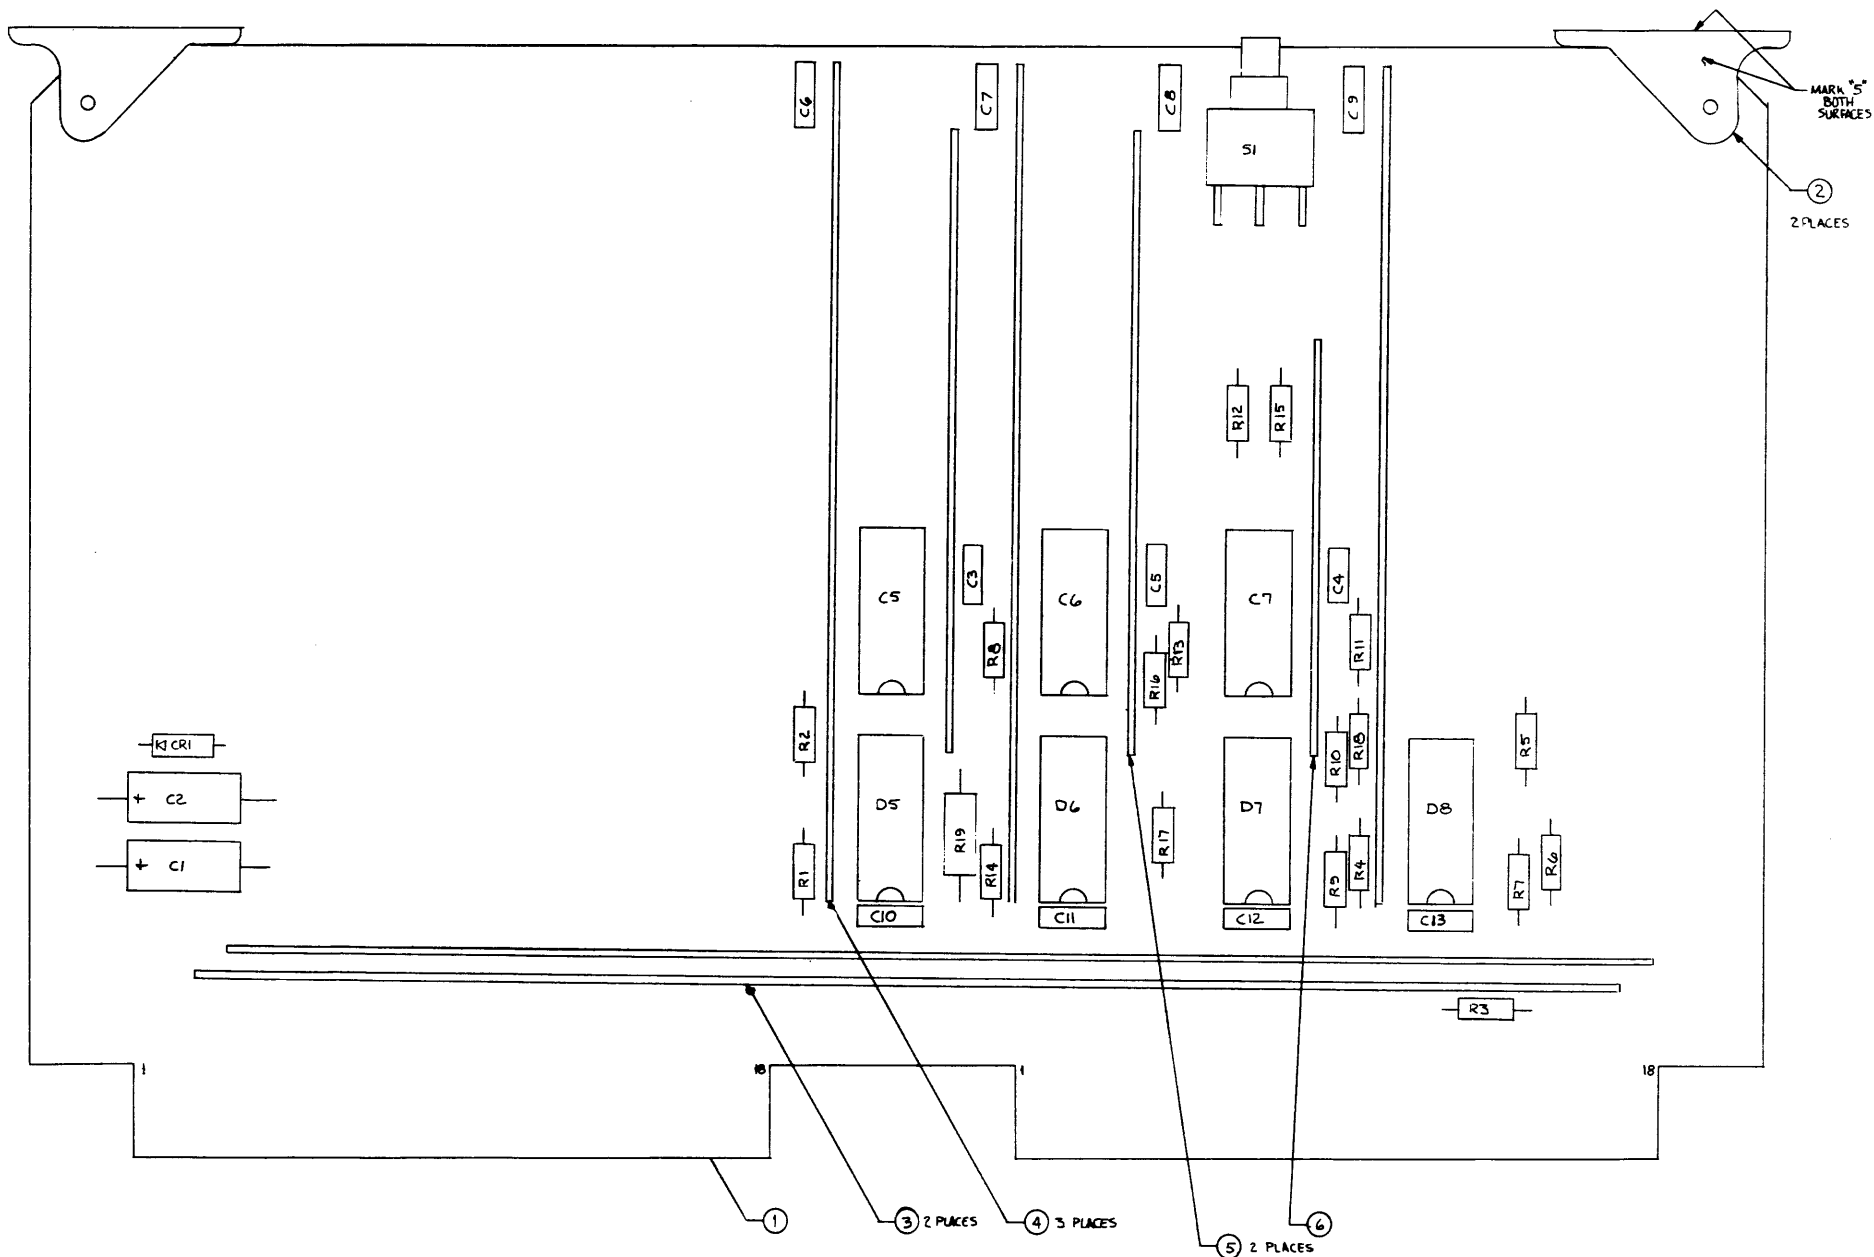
Assembly Diagram, Receiver Card (Model 2892A)
